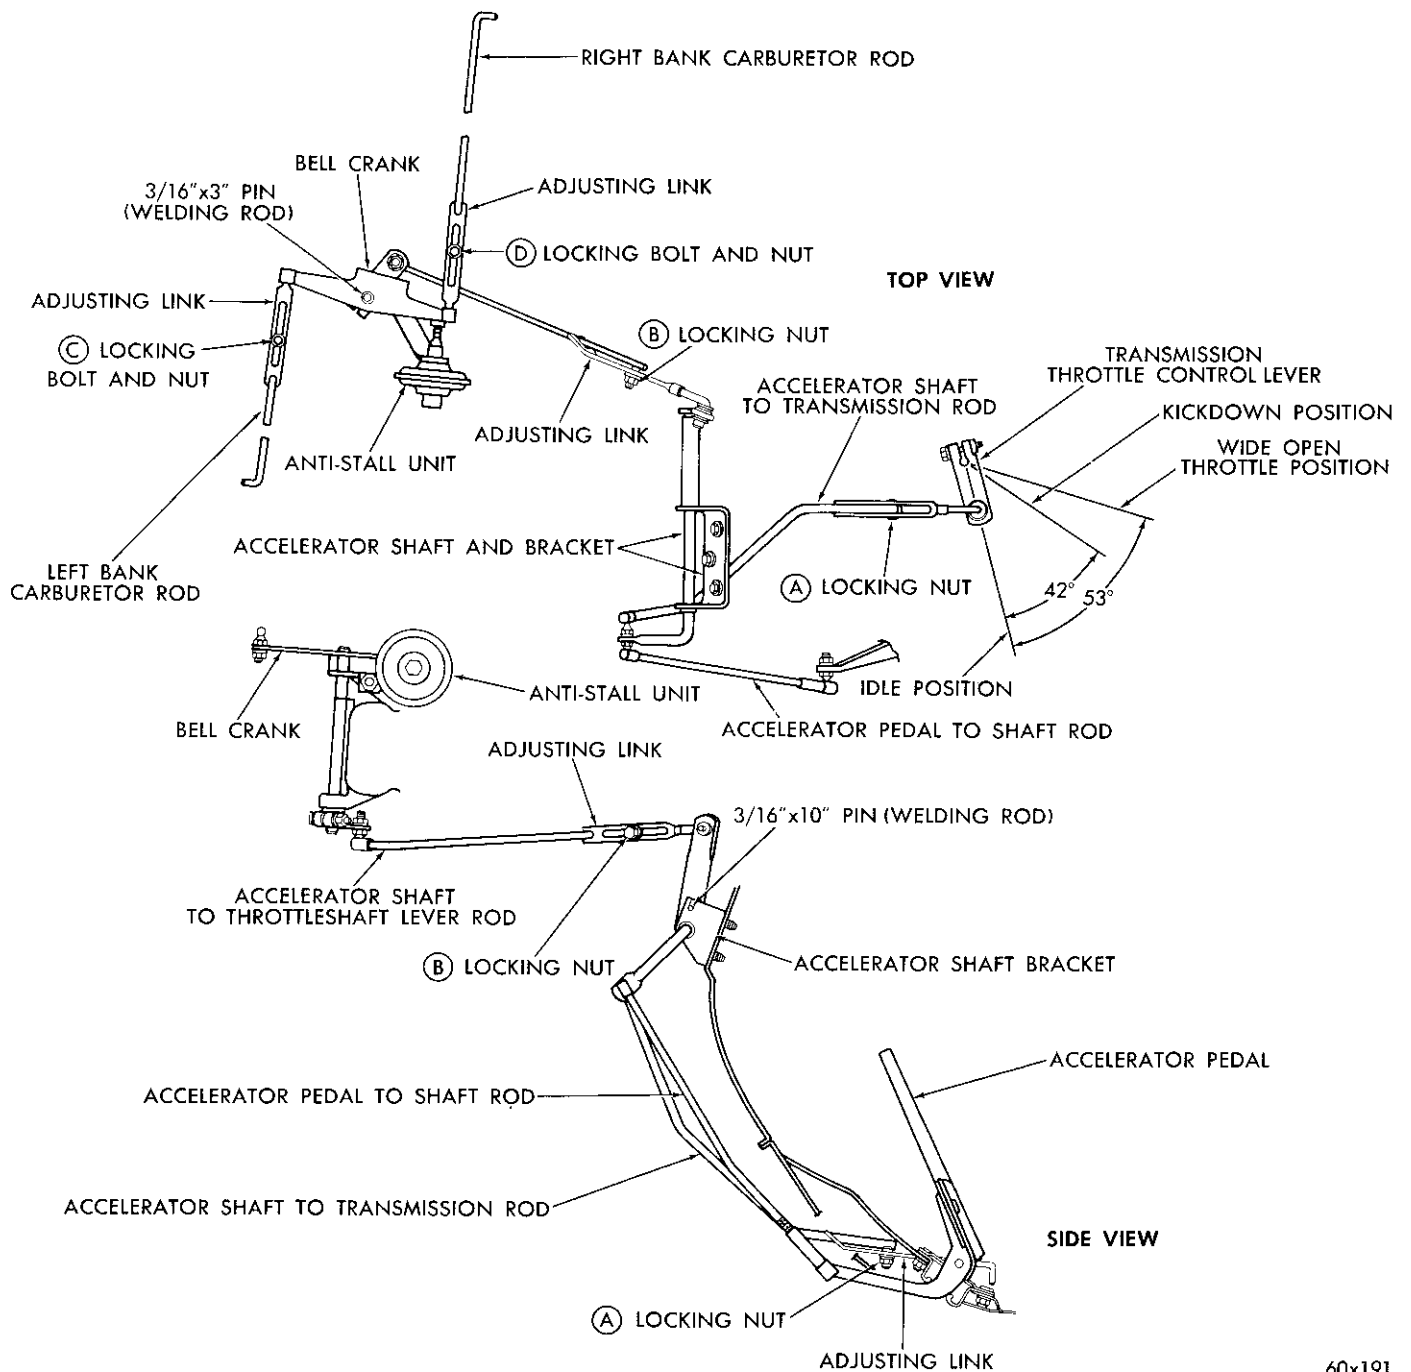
Throttle Linkage - Ram Manifold (Schematic View)
